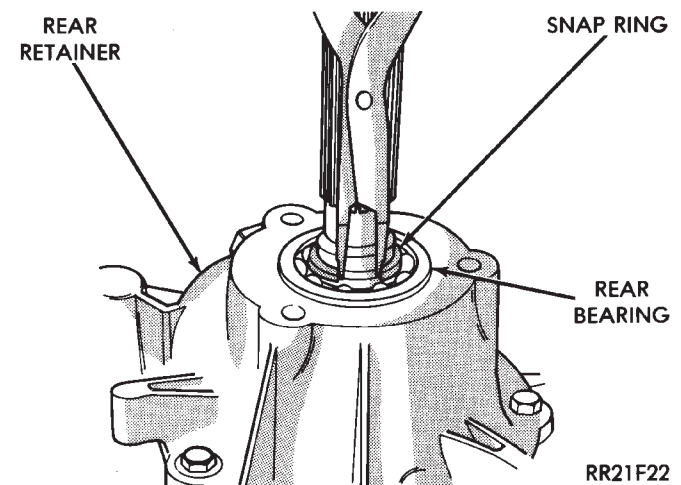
Installing Mainshaft Rear Bearing In Rear Retainer
